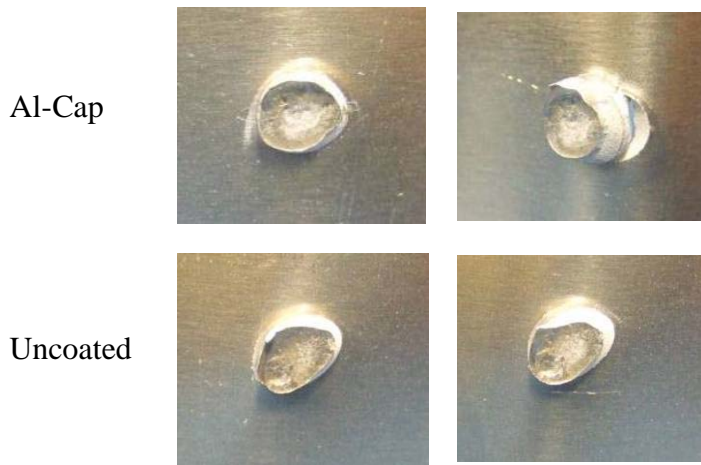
Peeled Weld Buttons from Weld Current Testing at 24kA
